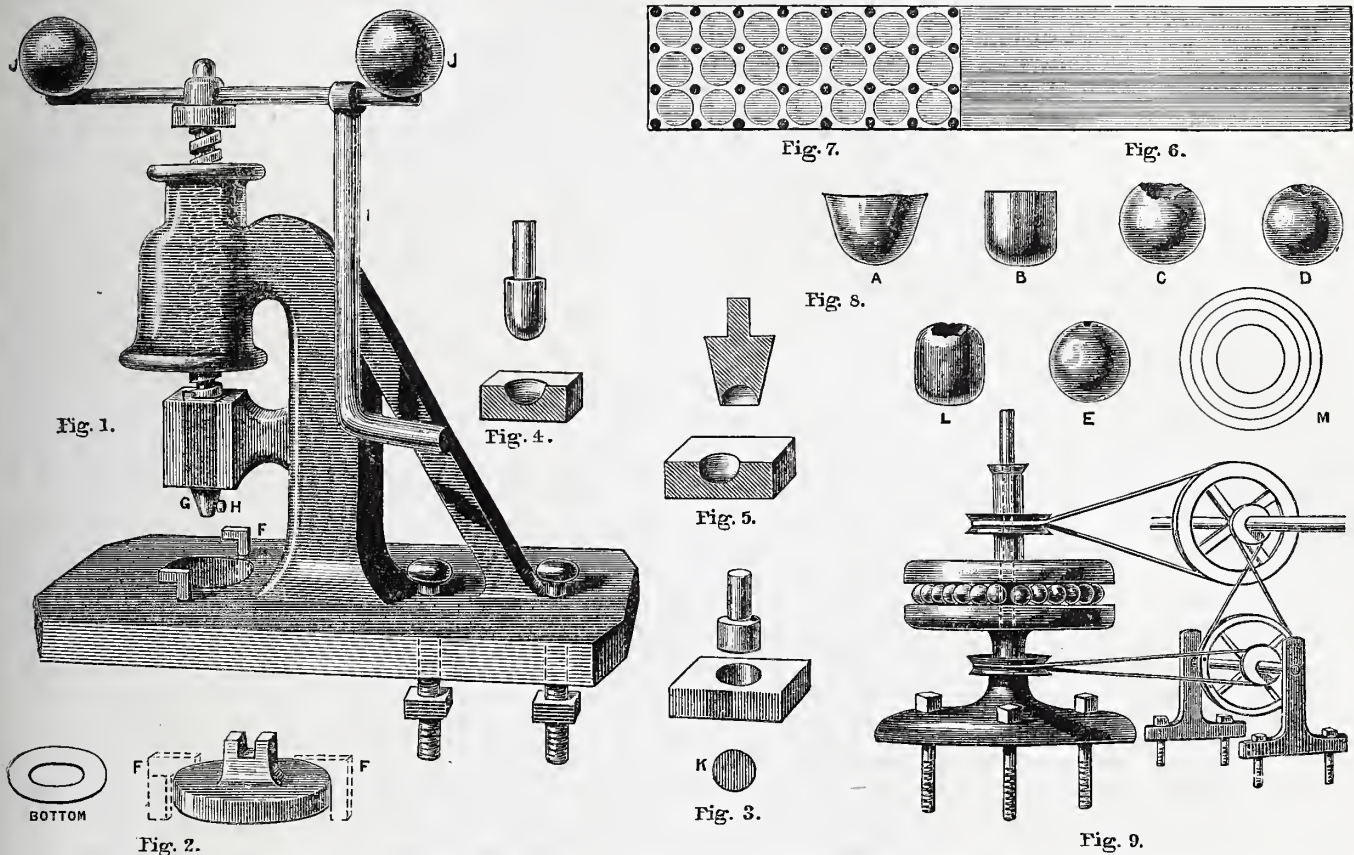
Fly for Stamping Metal Balls to be bolted to Strong Bench. Fig. 2.—Slotted Holder to carry Punch. Fig. 3.—Boss or Bed and Punch. Fig. 4.—Punch for Stamping Balls. Fig. 5.—Hollow Cup Punch. Fig. 6.—Sheet of Metal for cutting. Fig. 7.—Sheet of Metal with Places for Balls cut out. Fig. 8.—A, B, C, D, E, L, M, Shapes assumed by Metal at various Stages of Punching. Fig. 9.—Revolving Mill for Polishing Balls.
